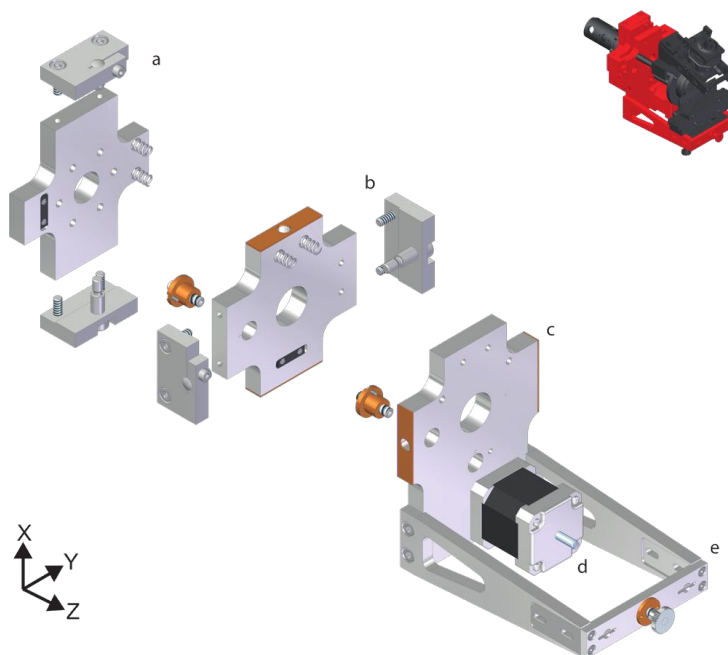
The mechanical hinge consists of three plates (a,b,c), which can be moved with respect to each other, an Owis stepper motor (d) and a holding construction for the sample bar assembly (e).
